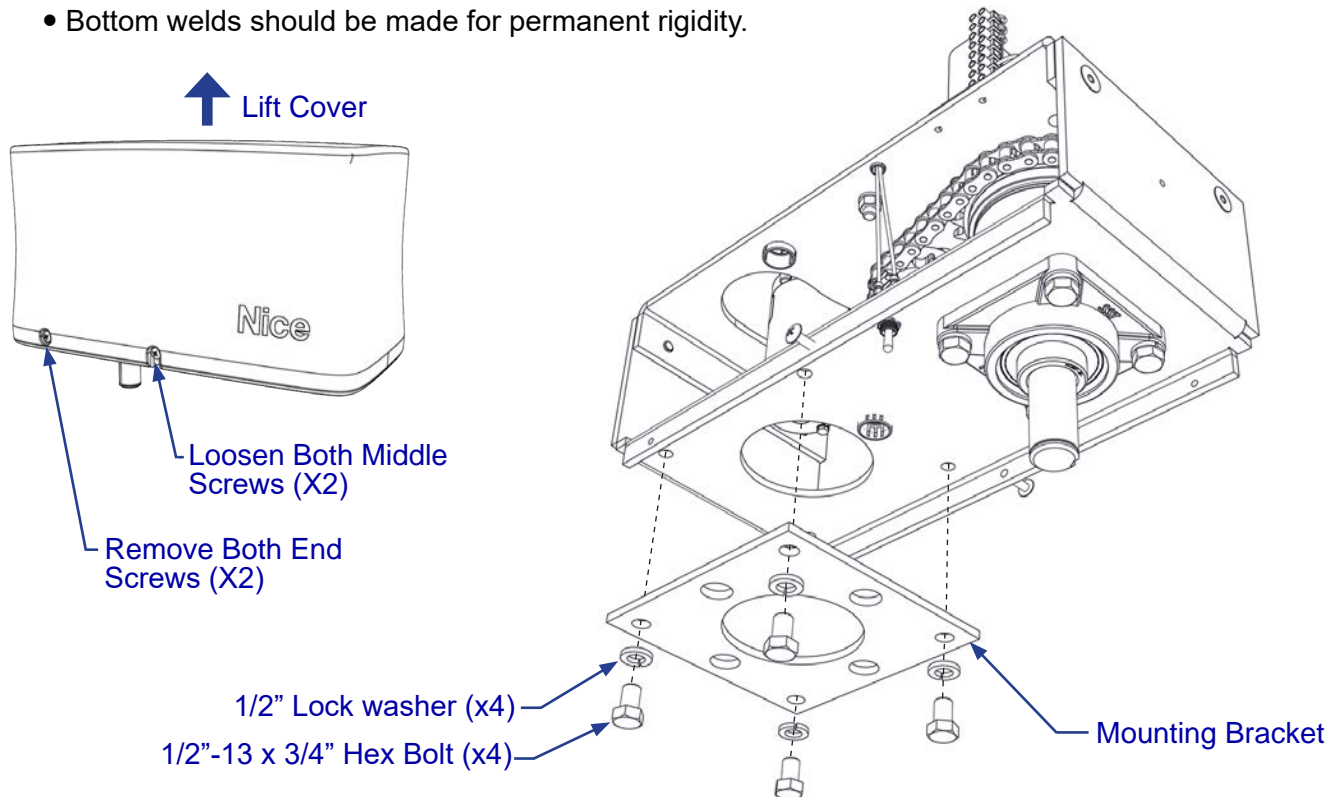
Removing Cover And Mounting Bracket From Chassis
